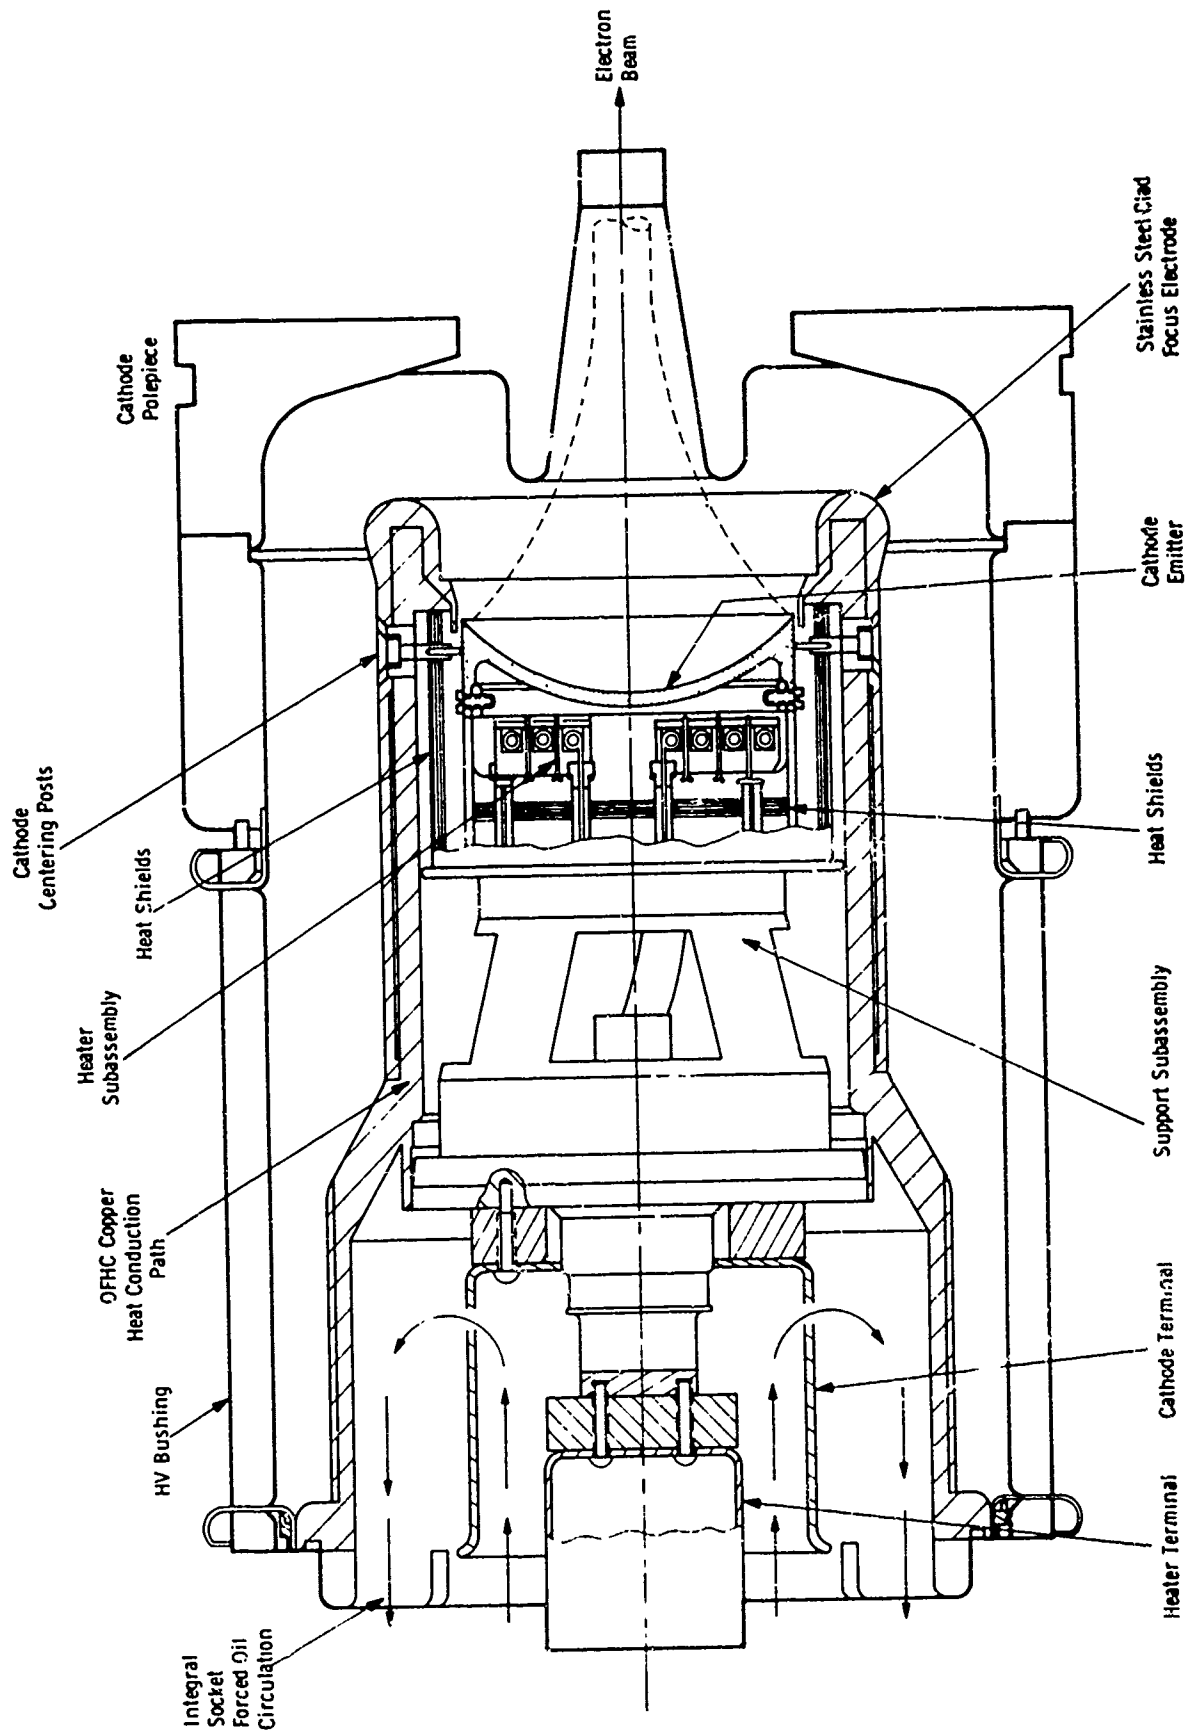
Cross-Section of VA-915A Electron Gun Assembly
